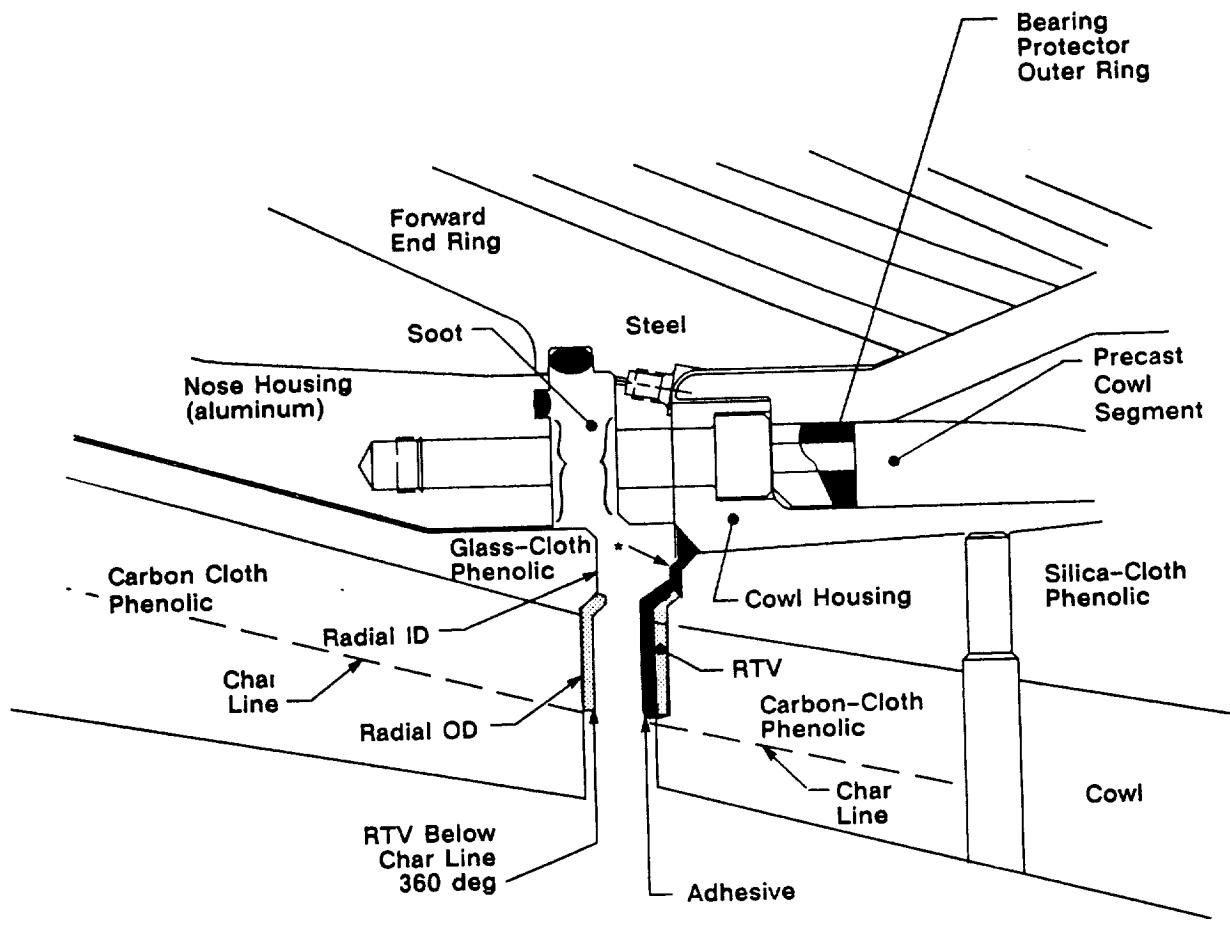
STS-26A Nose Inlet Housing/Flex Bearing Joint
